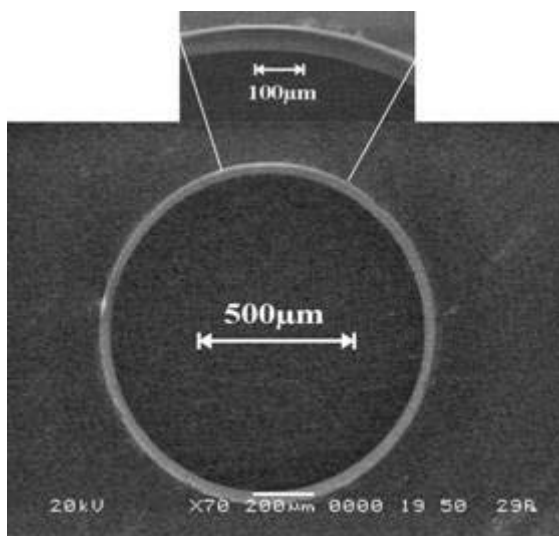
1 mm hole drilled in a 140 μm thick glass coverslip with a STACCATO laser
